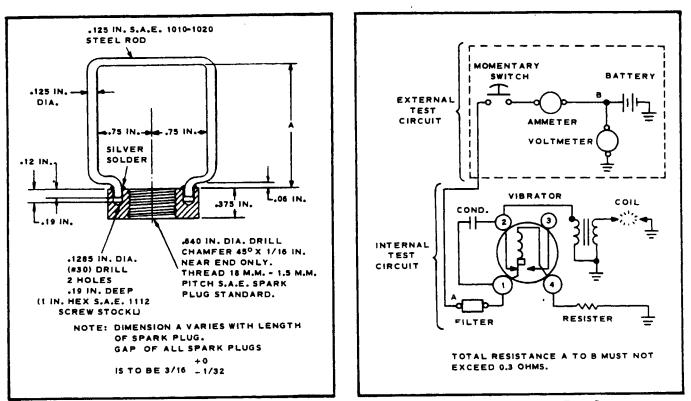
Spark Plug Fixture (39D18 Plugs)
